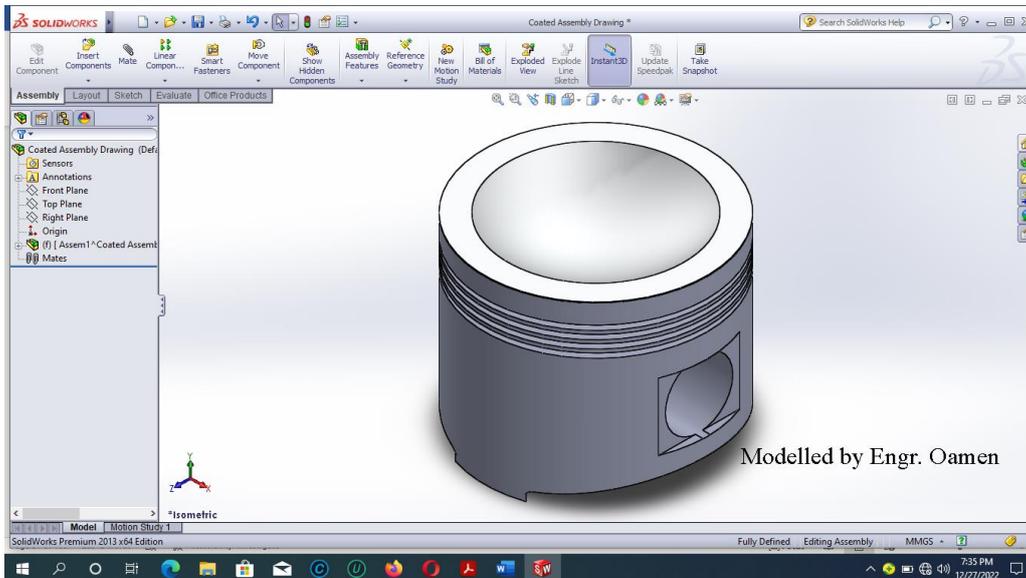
The assembly view of the reconditioned piston with bond and topcoat layers
